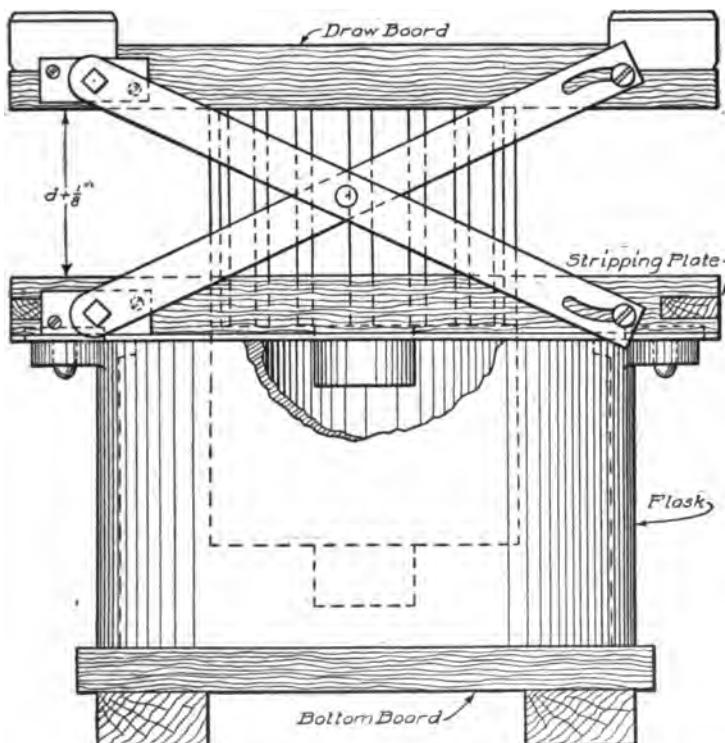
Draw Plate Turned over and Pattern Drawn; Flask and Bottom Board Also Shown. A further Lift of Drawboard Removes Machine from Mold
